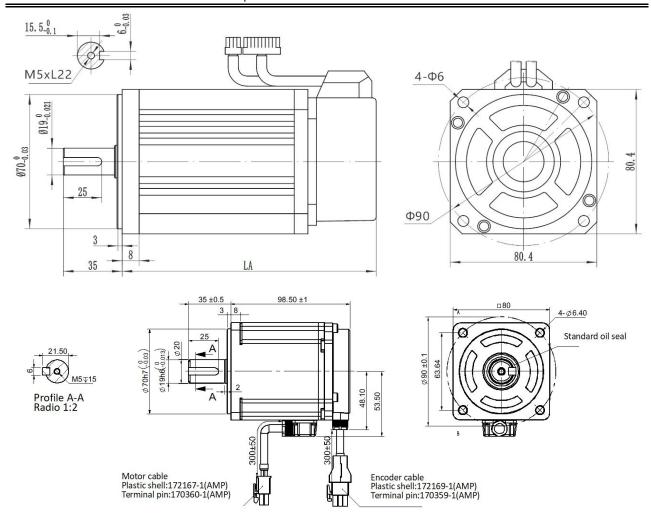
Installation dimension drawing of WE series 80 flange servo motor
